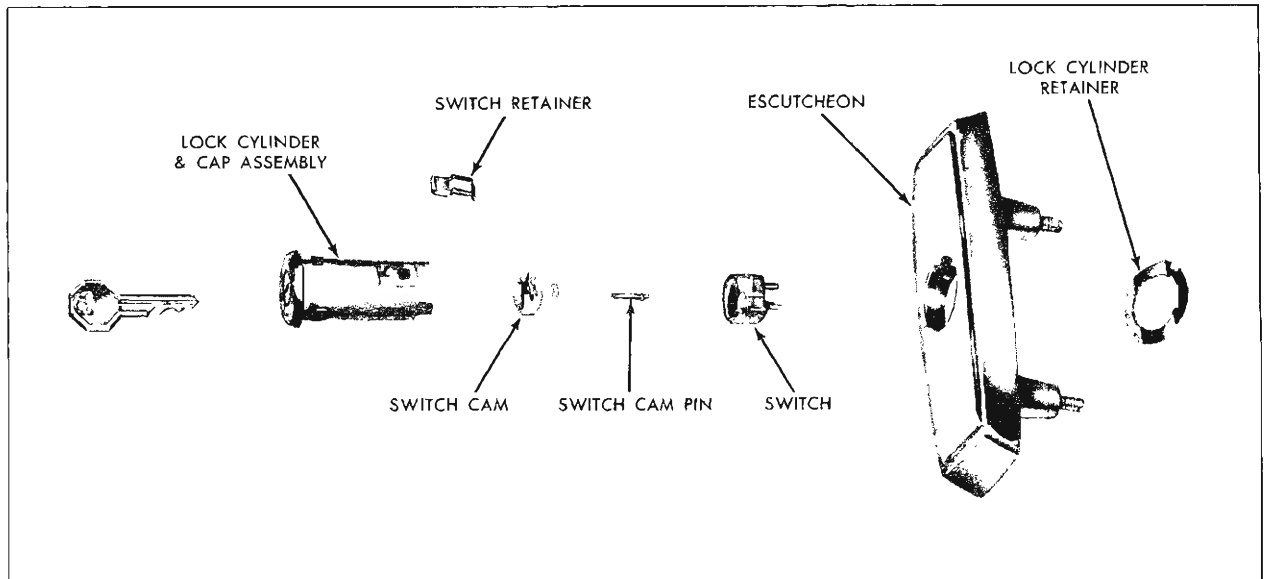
Tail Gate Lock Cylinder, Switch and Escutcheon Assembly
